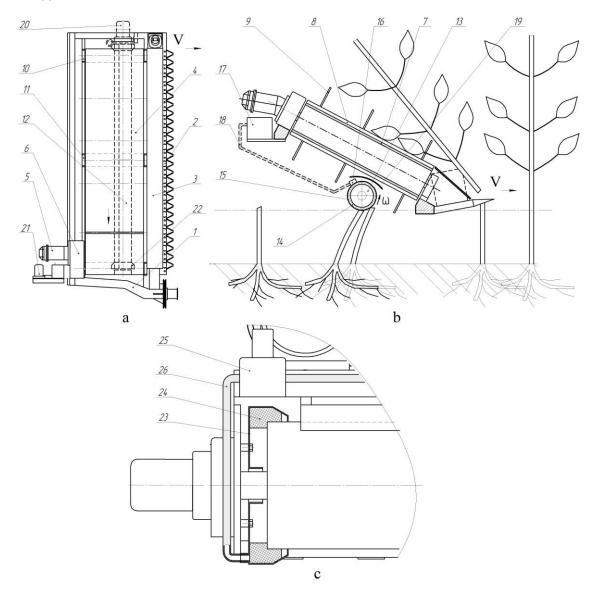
Scheme of the working tools of the contact action weeding mechanism
